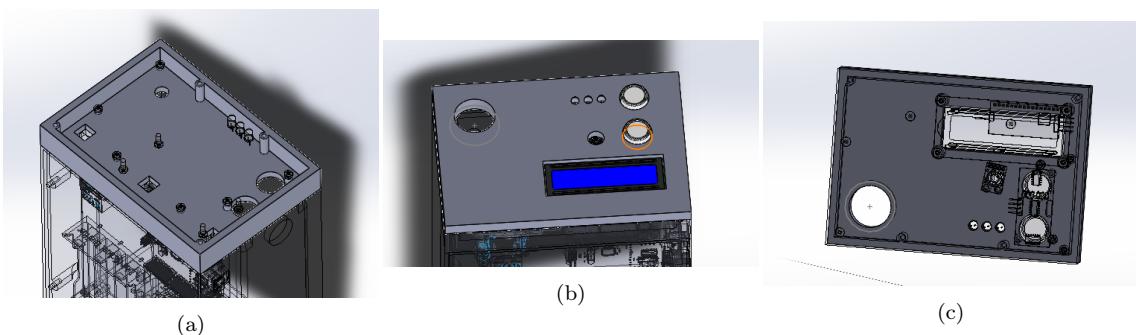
Piece 4 (a), upper view of piece 5 (b), bottom view of piece 5 (c).
